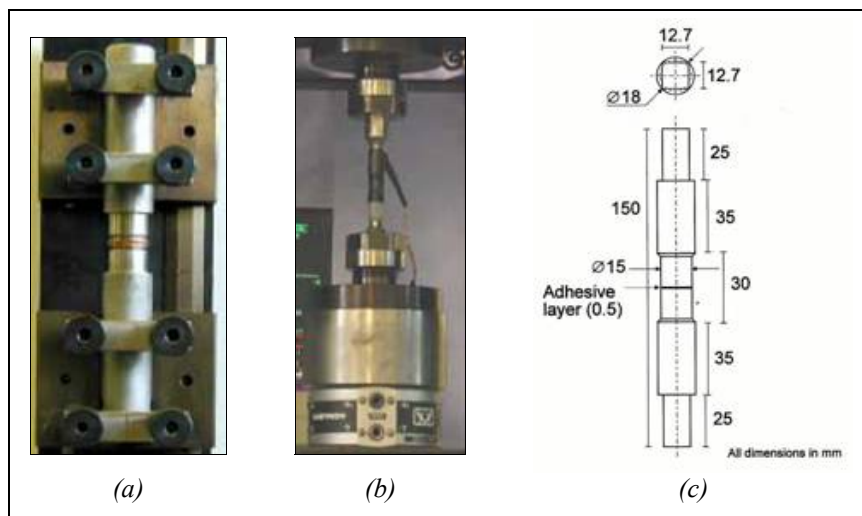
(a) Bonding Fixture; (b) alignment fixture; (c) butt joint specimen.
